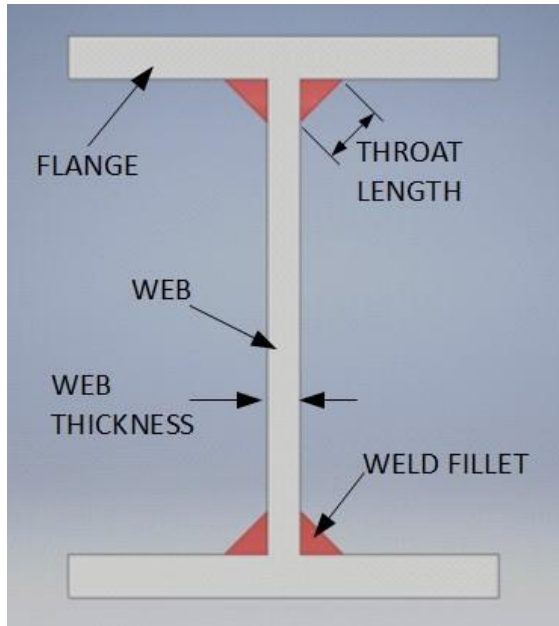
The cross-section of the current I-Beam design, where the weld fillet, shown in red, joins the web to the flange.
